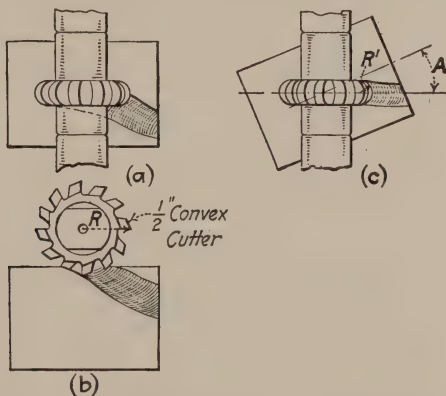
(a) Top view and (b) front view of spiral groove cut without swiveling the table. If the cutter is $2\frac{1}{2}$ in. in diameter, the radius of the groove is about $1\frac{1}{4}$ in., approximately equal to R , the radius of the cutter. Note in (c), which represents the top view with the table swivelled to the angle of the helix A , that the radius of the groove is $\frac{1}{4}$ in., or equal to R' , the radius of the curve of the cutting edge.
